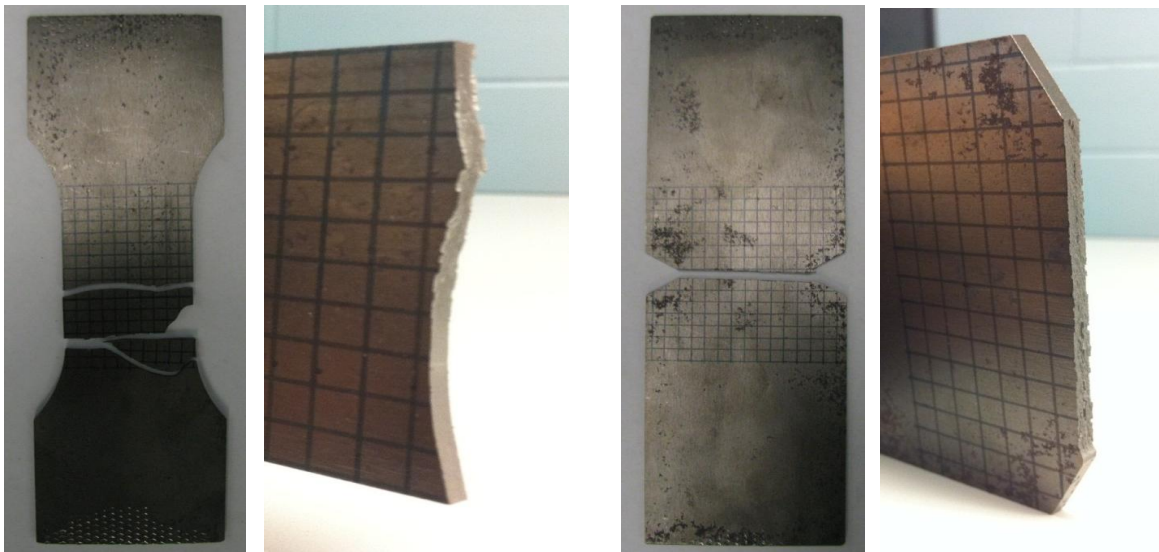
Fracture surfaces brittle steel samples (Left: un-notched, right: notched)
